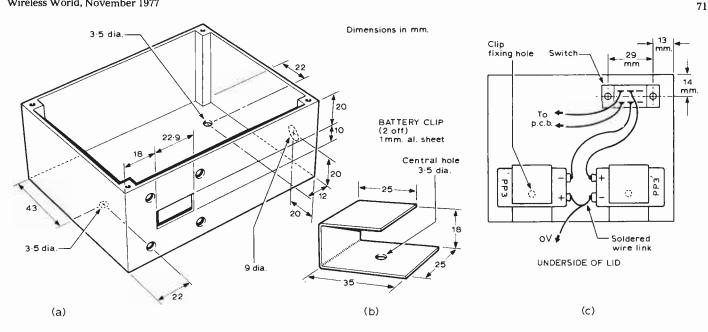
Hole positions on the receiver box, together with battery mounting details.
